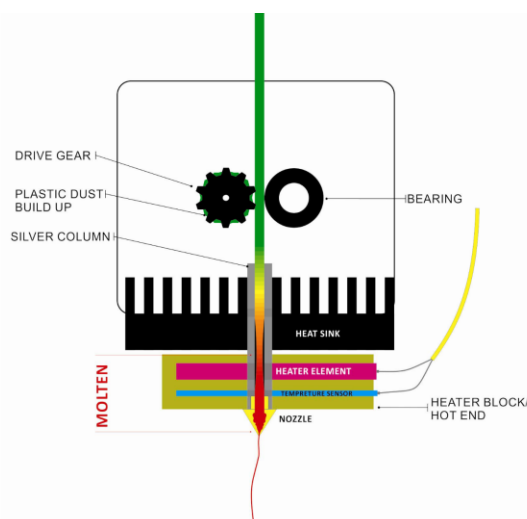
Schematic Diagram of a 3D Printing Extruder [14].
